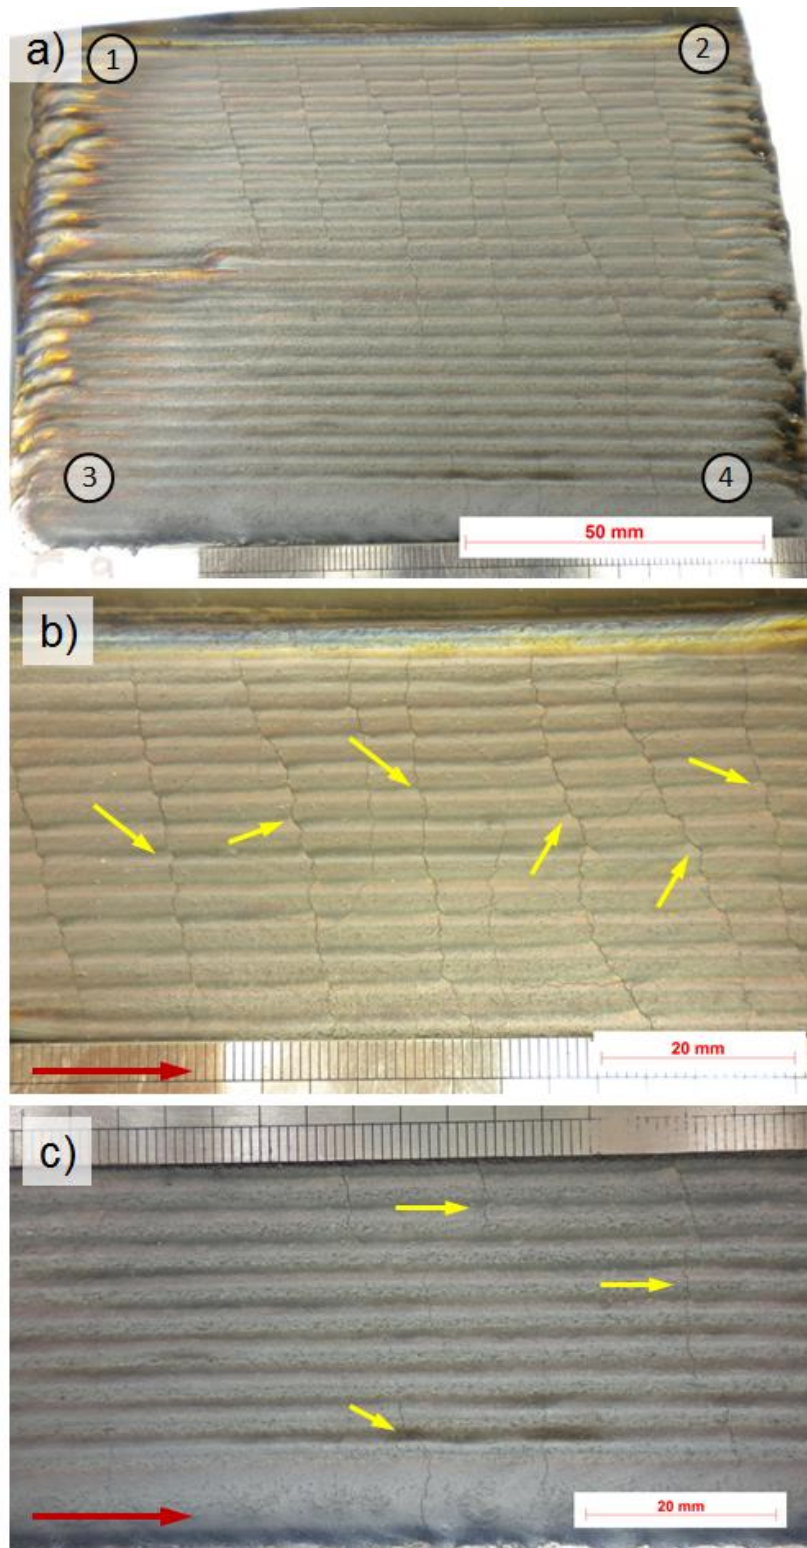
Cladding trial in overlap; a) PFR = 5 g/min; b) magnified image of a); 1: Beginning of first weld; 2: finish of first weld; 3: beginning of last weld; 4: finish of last weld; red arrow: welding direction
